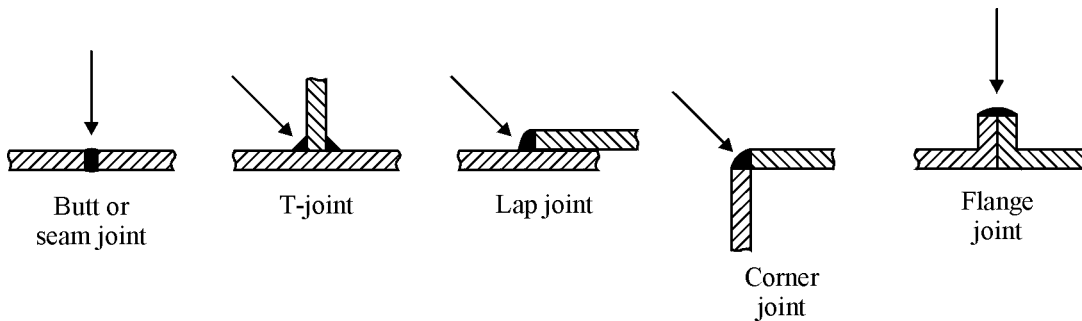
Configurations for different weld joints. Arrows show the direction of the laser beam.
